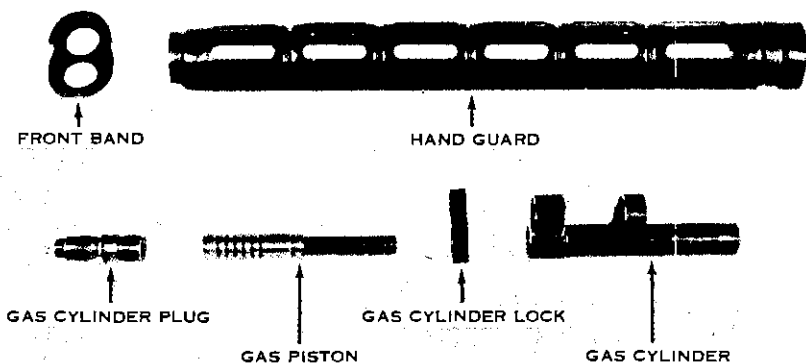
(Superseded) Parts of the gas system, handguard and front band.
